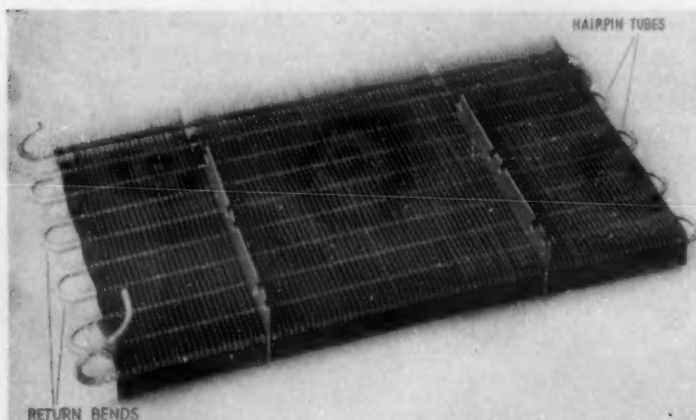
Condenser assembly made of steel fins and steel tubing which has approximately 1050 joints copper-brazed in a single trip through the furnace.
